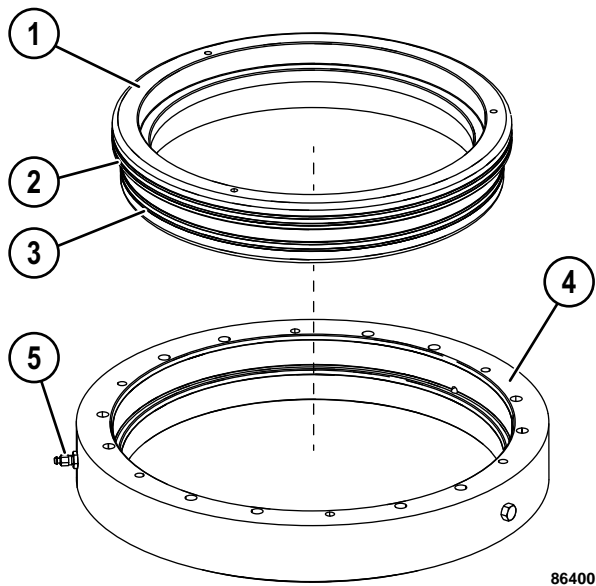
PARKING BRAKE DISASSEMBLY & ASSEMBLY
